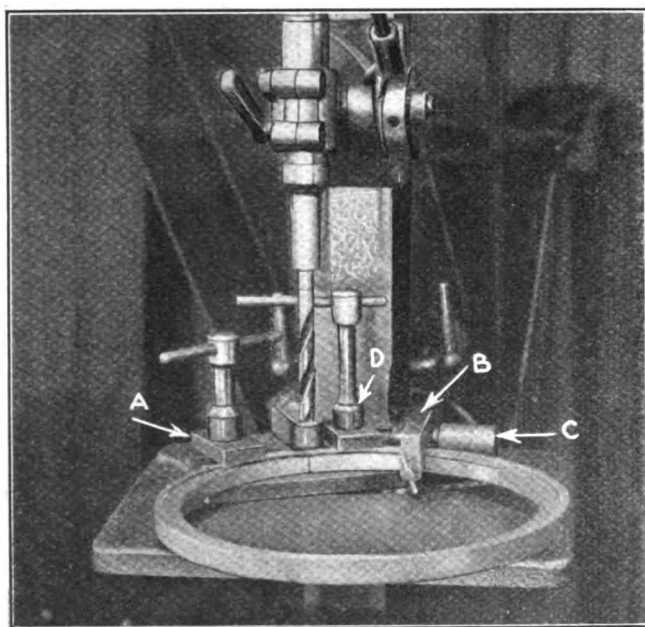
DRILLING A SPLIT VALVE PACKING-RING
